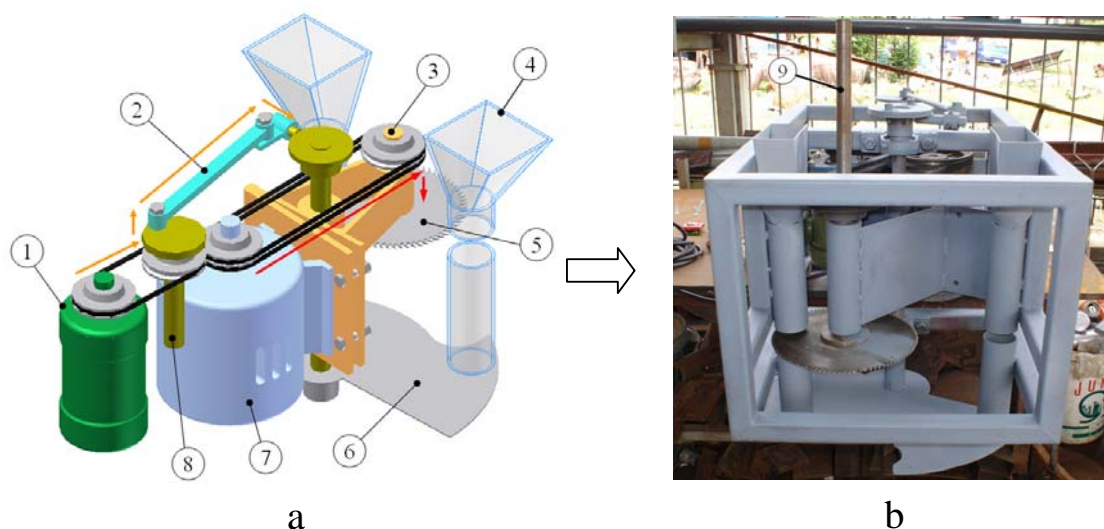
The power transmission (a) and the prototype of cassava stem cutting unit (b): 1-cam motor ; 2-cam mechanism; 3-cutting shaft; 4-feeding chute; 5-circular saw blade; 6-bottom plate; 7-saw electric motor; 8-cam shaft; 9-position of torque transducer
